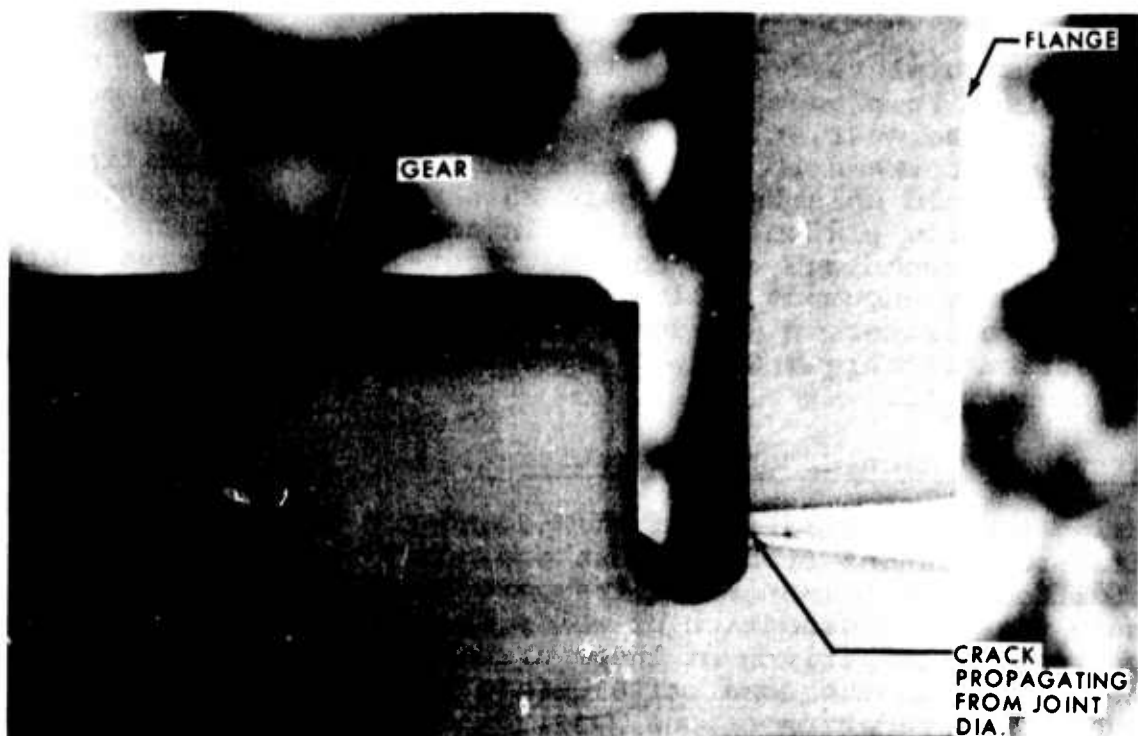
Crack - Gear/Flange Assembly, Second-Row Pinion.
